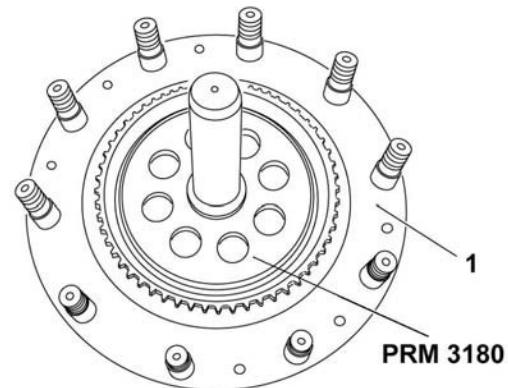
Outer rings of the tapered rollers - pressing into the wheel hub
